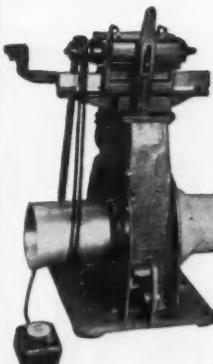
Original Design of wire straightening machine. Required considerable machining, cleaning and finishing prior to painting.
